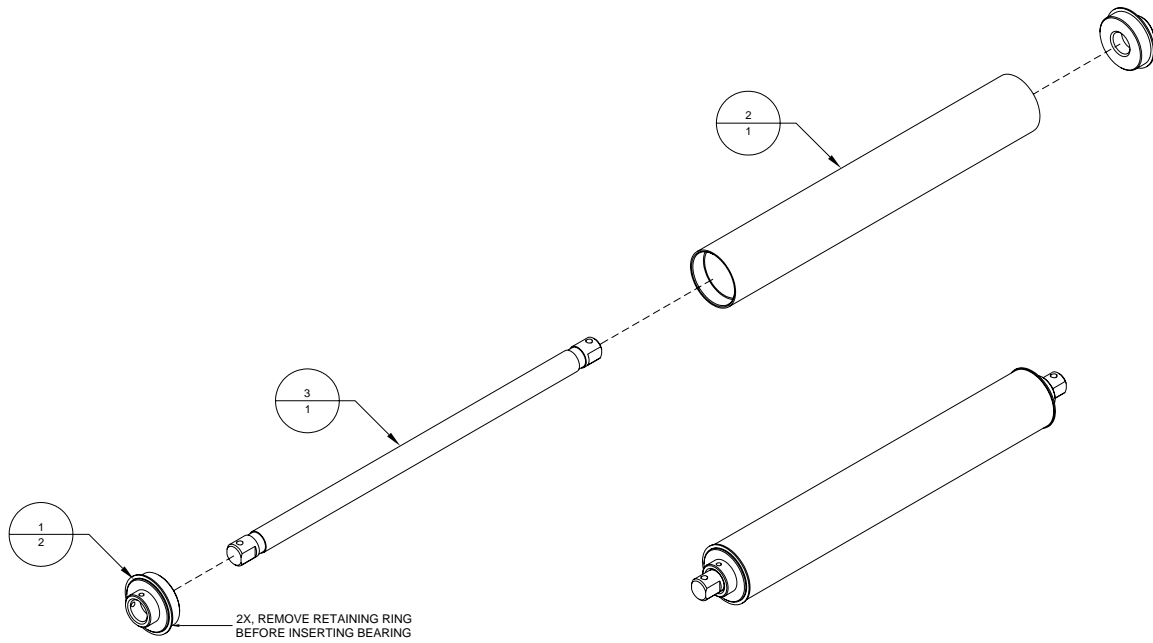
Take-Up Roller Assembly (9101038A)
